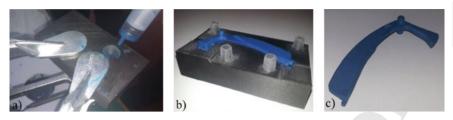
a Injection of resin into the inflow channel, \mathbf{b} appearance of the casting after separation of the upper and lower molds and \mathbf{c} appearance of the casting after removal from the tool
